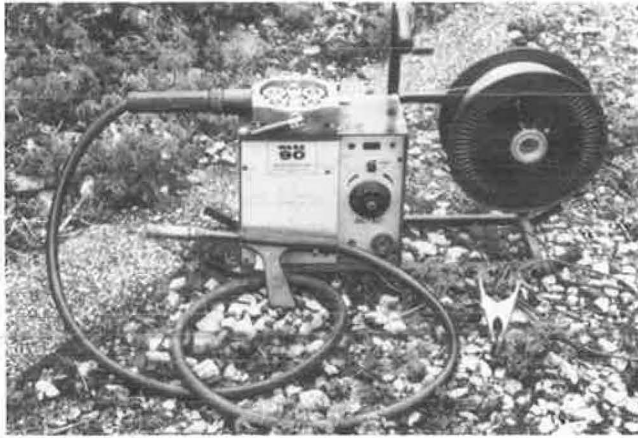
Welding Alloys WSHA 90 wire feed unit.
